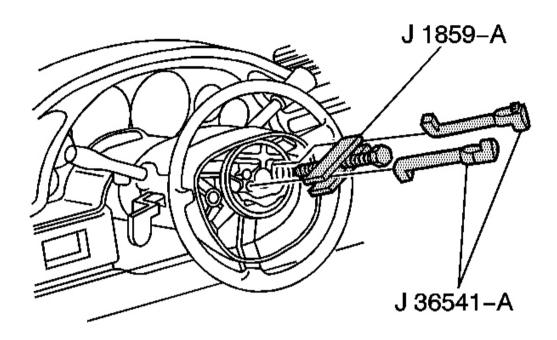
J 42640 & J 36541-A Courtesy of GENERAL MOTORS CORP.
